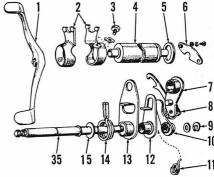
Exploded view of gear shift assembly. On HM/S models, clutch cam (34—Fig. BS1-15) is attached to right end of shaft (35). Shift forks (2) are interchangeable.
